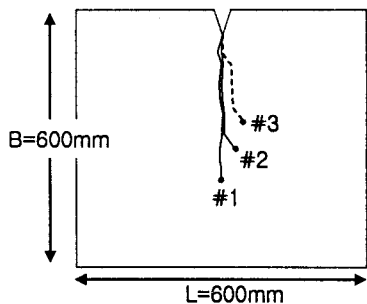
Crack path of specimen (Plate thickness:80mm)
